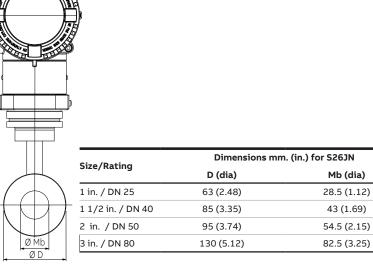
266HRH / 266NRH with barrel housing and direct mount seal S26JN in-line
